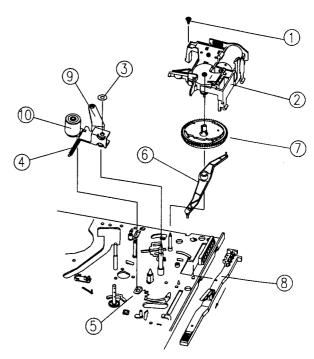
L/C BRKT, PINCH LEVER, CAM GEAR, RELAY LEVER, F/L RACK REMOVAL
